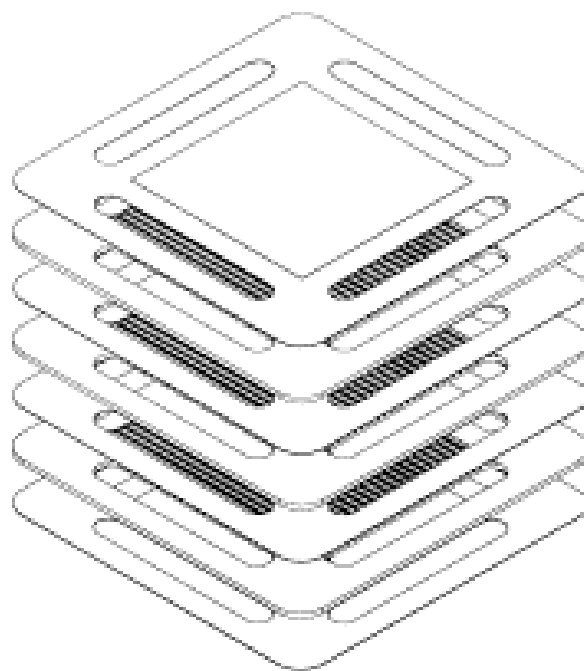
Exploded view drawing of all-ceramic, 1000°C solid oxide fuel cell stack that was tested in test stand.
